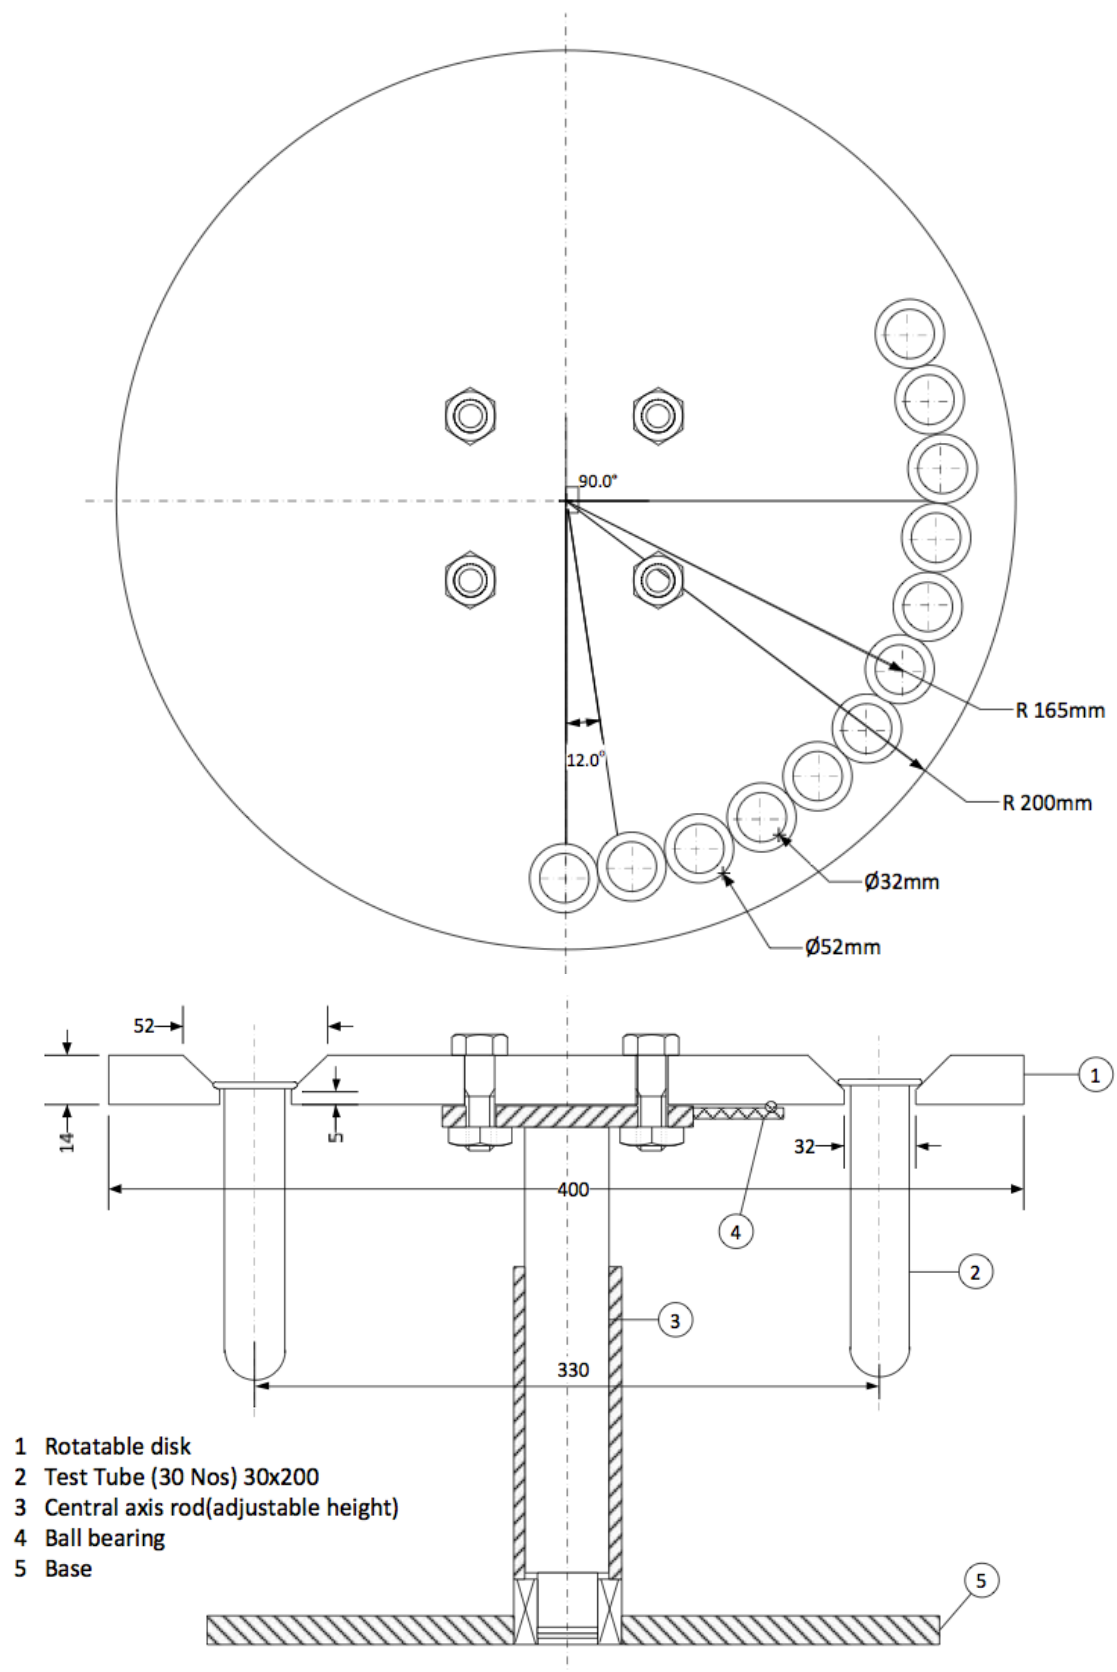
Schematic Drawing of Sample Collector (In Unit of mm)
